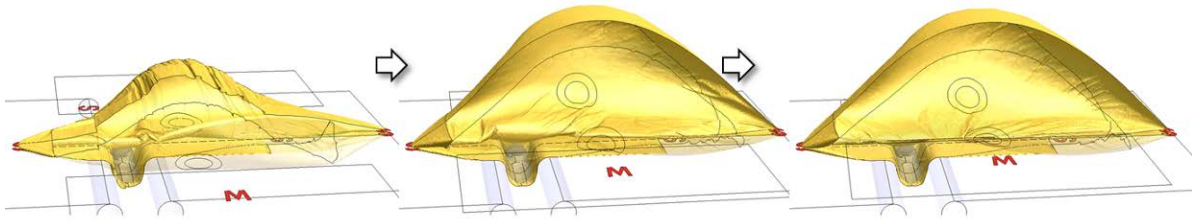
Step 3 – plates slide in to tuck the sides while pressure inflates the upper section
